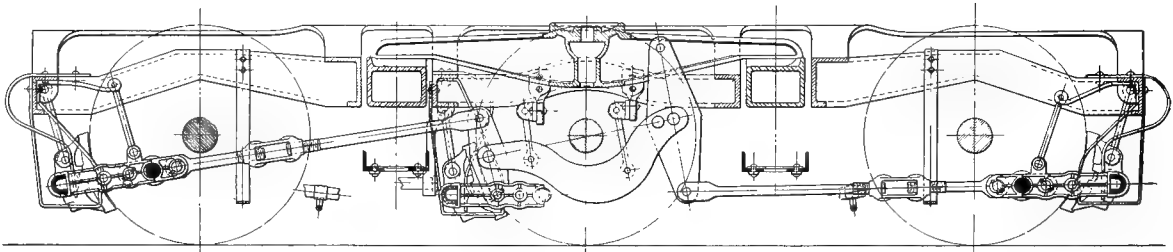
Arrangement of Brake Rigging for Triple Brakes on Six-Wheel Passenger Train Car Trucks. Chicago Railway Equipment Company.
